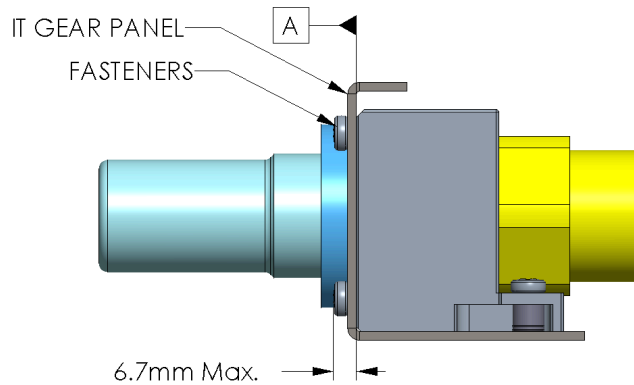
Plug Side View attached to a reference sheetmetal panel
